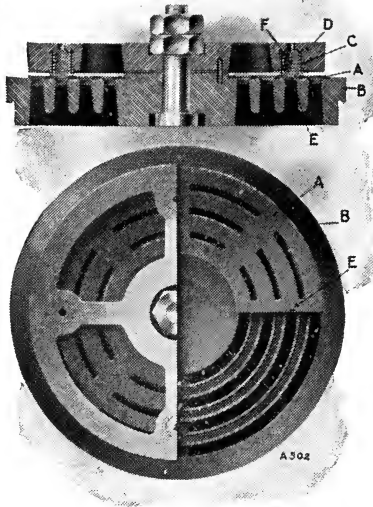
Section of Valve and Seat (Sentinel Compressor).
